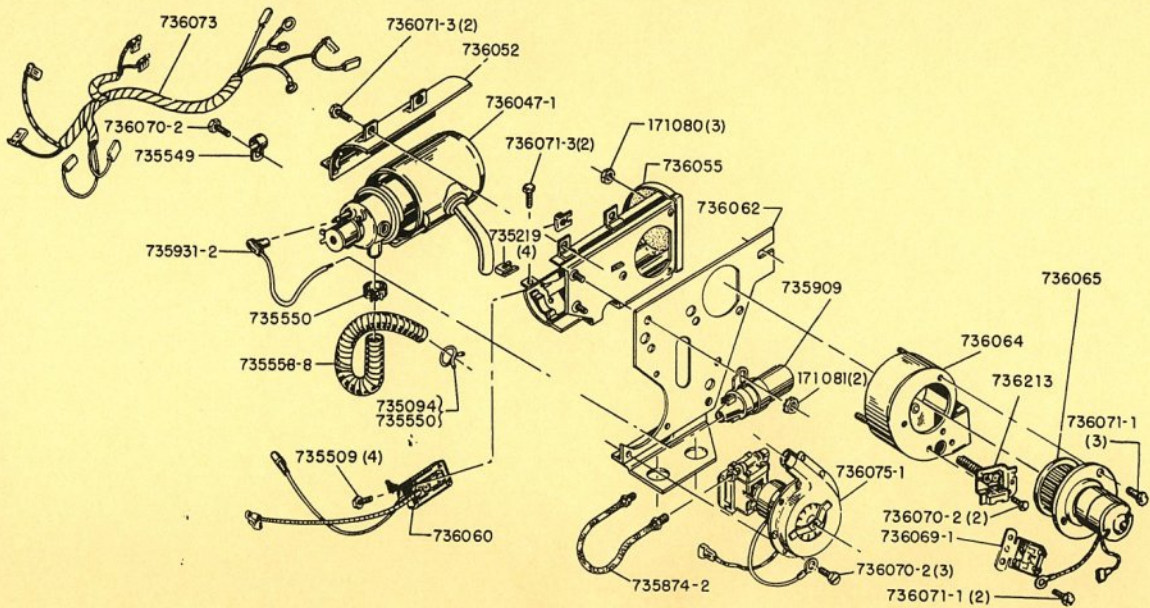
HEATER & BRACKET ASSEMBLY 736000
